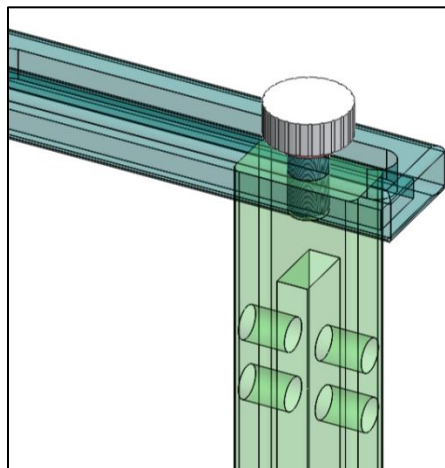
SLIDING TRACK BRIDGE COMPONENT
